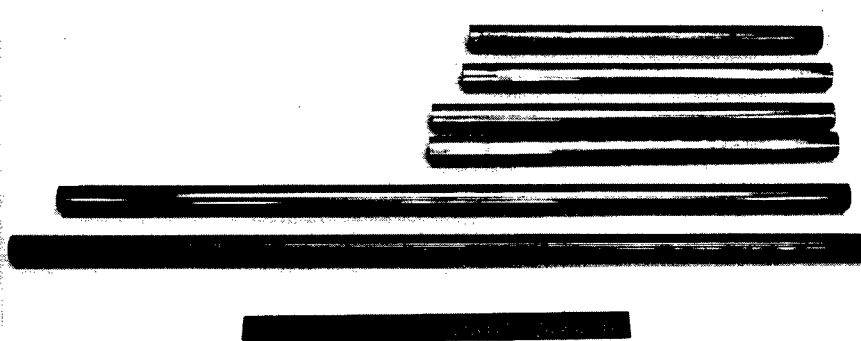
EXTERNAL SIDE VIEWS OF FOUR 18-INCH AND TWO 36-INCH HEAT RECEIVER TUBES; Post Brazing
